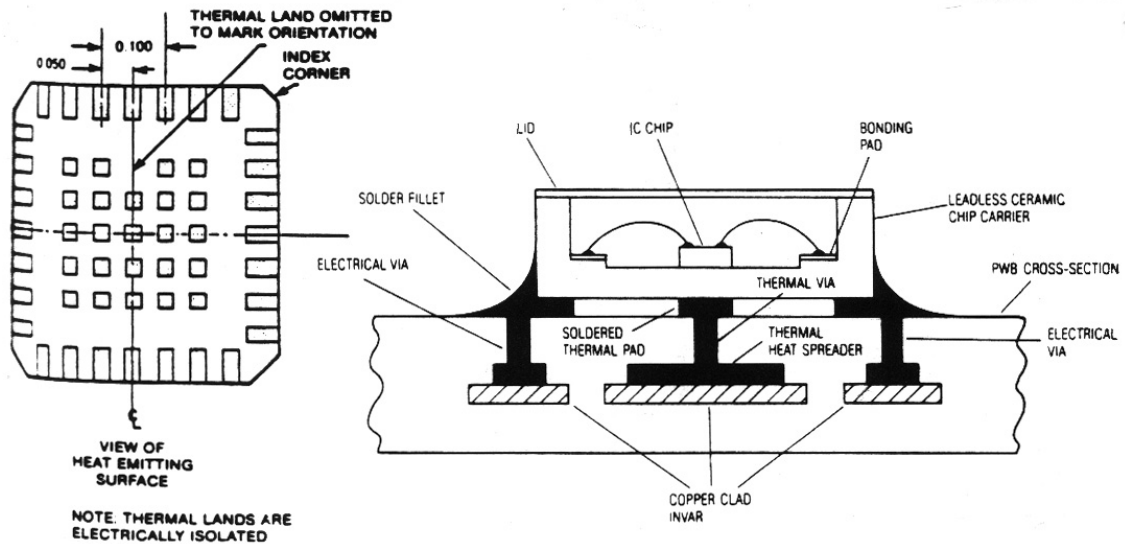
LLCC package with thermal solder lands and thermal vias connected to a metal core in the PCB.
